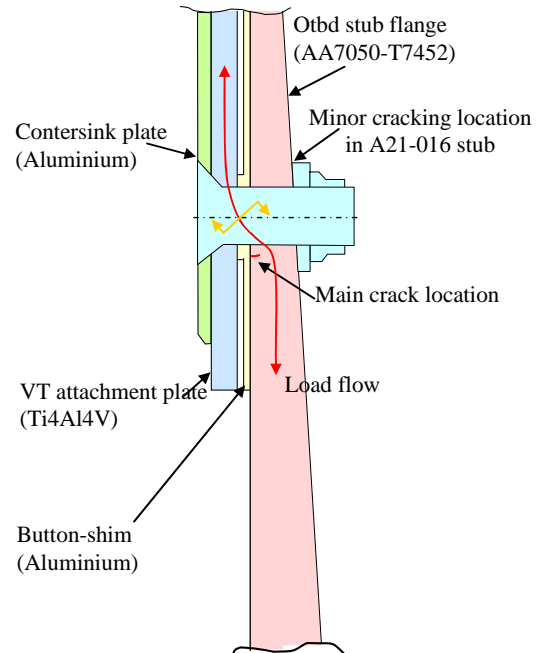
A schematic of the VT fitting to stub attachment at the lower fastener hole.
